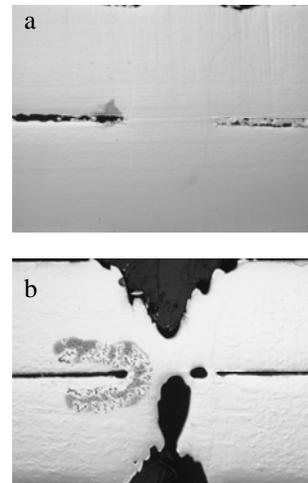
Comparison of weld porosity a) weld made with copper alloying medium b) weld made without copper alloying medium
